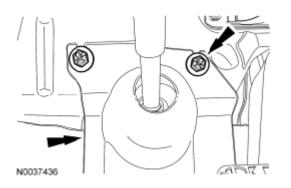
Locating Steering Joint Cover And Nuts Courtesy of FORD MOTOR CO.
